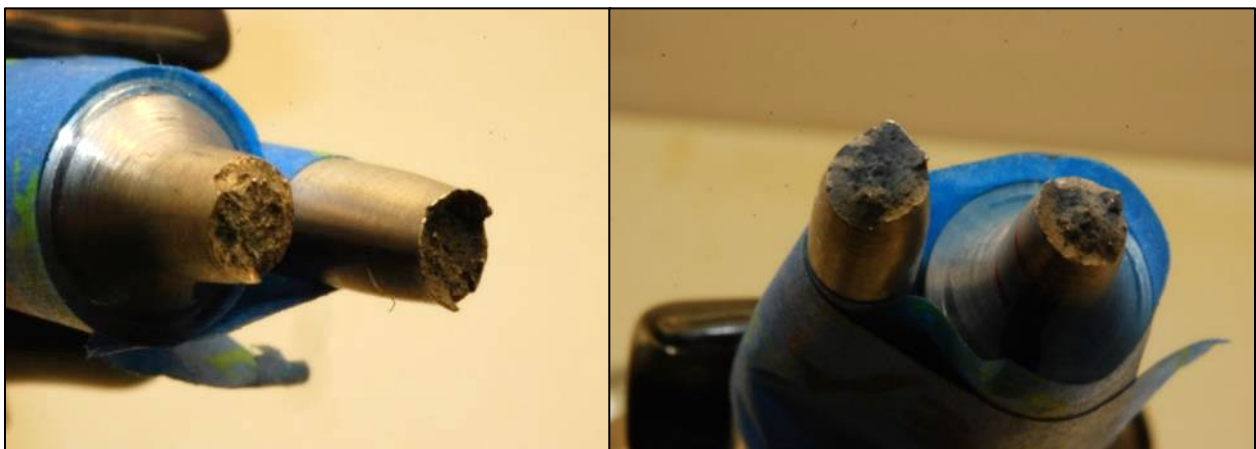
The “H” specimens (left) and “V” specimens (right) both exhibited cup-and-cone fracture modes, with the H specimens showing more complete cup-and-cone fracture and the less ductile “V” specimens showing partial cup-and-cone with brittle fracture in the center of the fracture surface.
